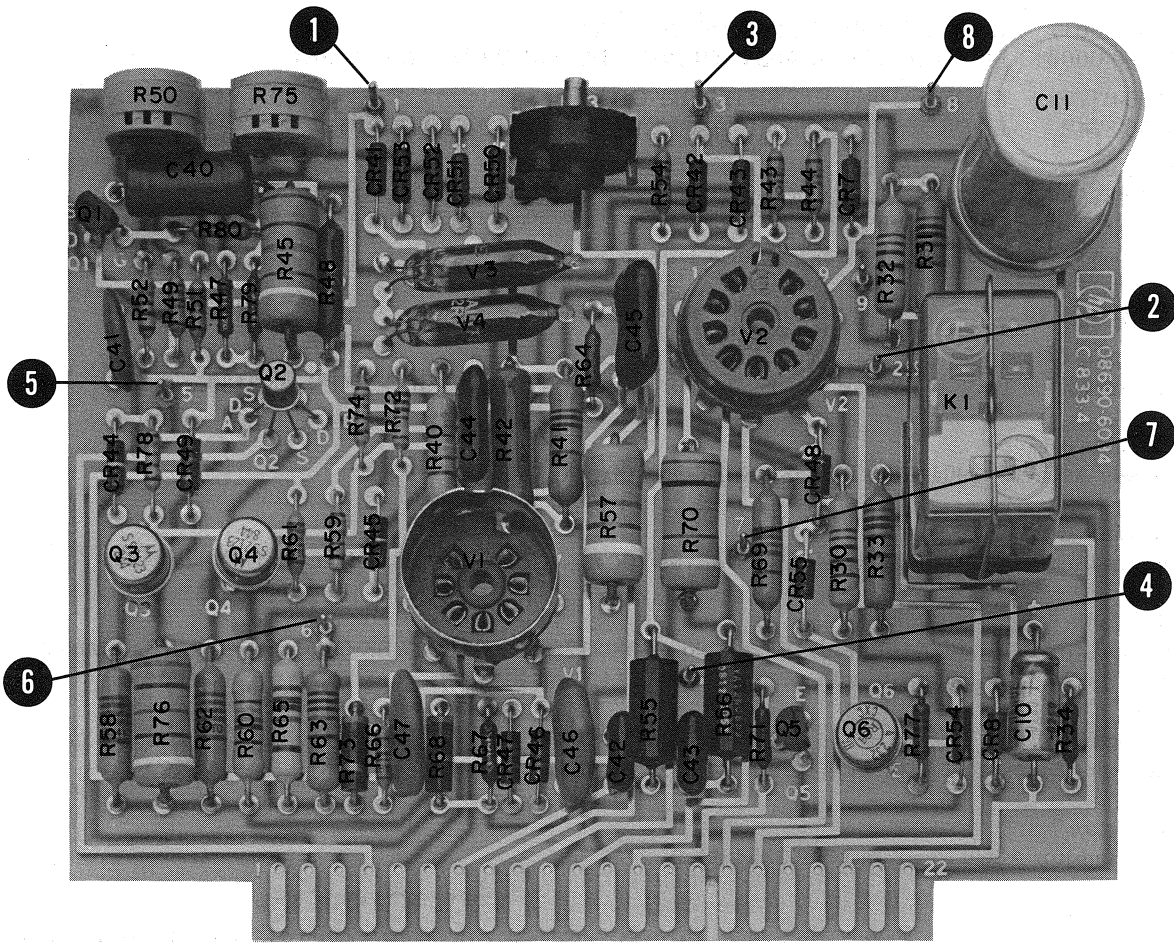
Component Identification, A3 Assembly (Part of Change 1)
